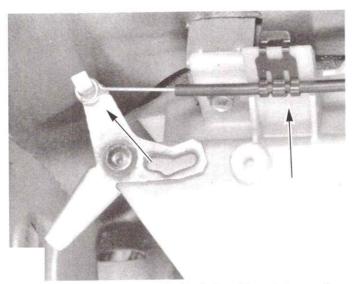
Removing the heater control lever assembly (Sec 29)
